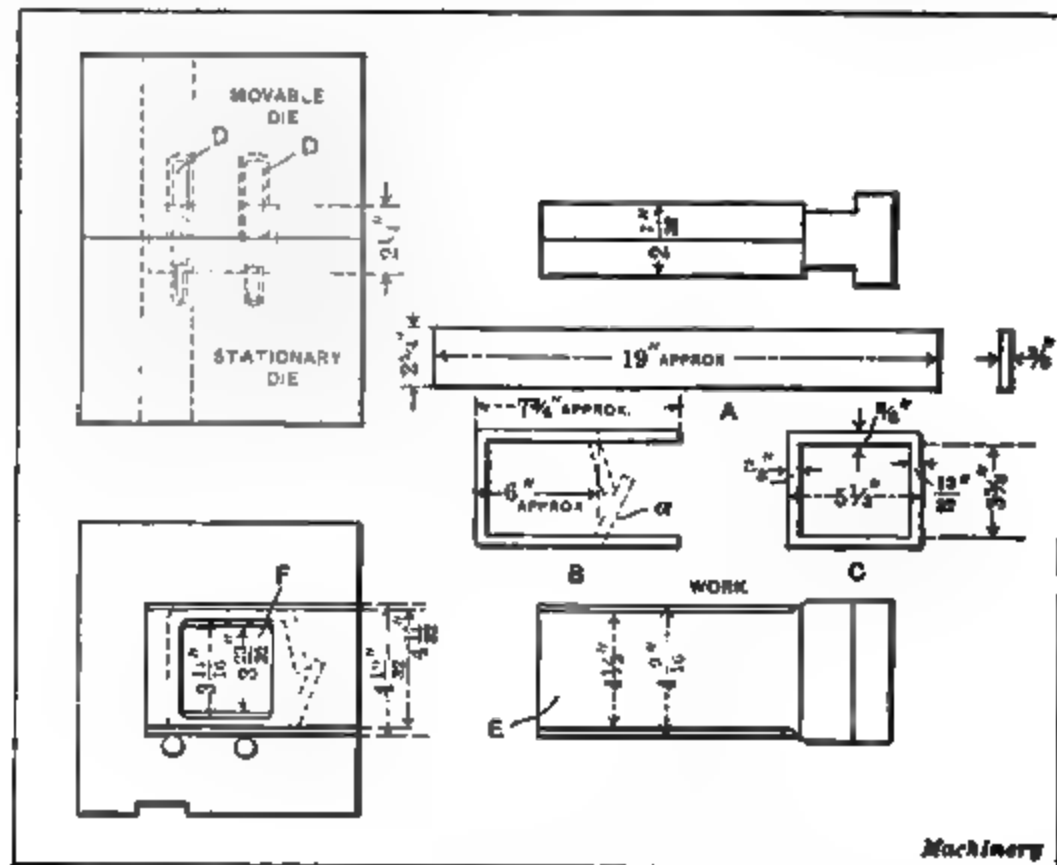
Forging Machine Dies and Tools for making Locomotive Spring Bands
